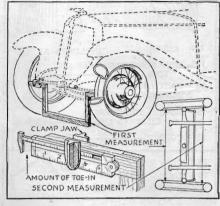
By clamping a slide caliper to end of a U-shaped wooden frame, you have a gage that can be used to test the toe-in of front wheels
